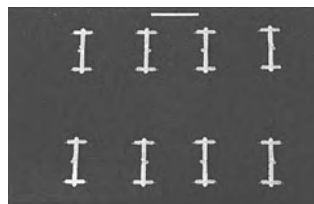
Runners between sprue nozzles and molded parts after mold conversion
